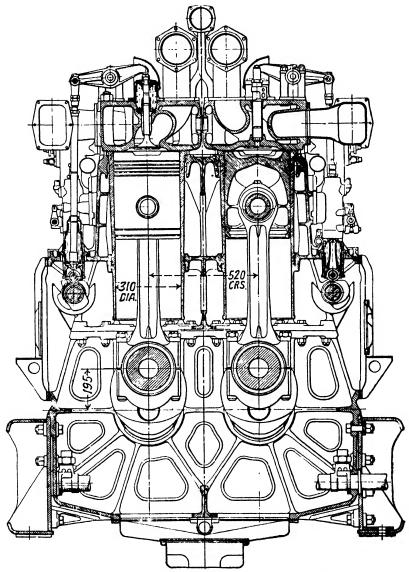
B. Cross-section of 2200 h.p. Sulzer engine.
